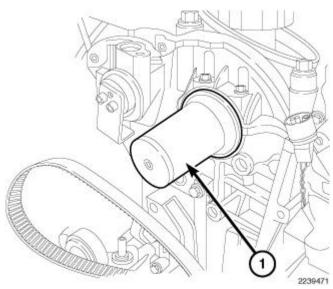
Intake Camshaft Oil Seal Courtesy of CHRYSLER LLC
